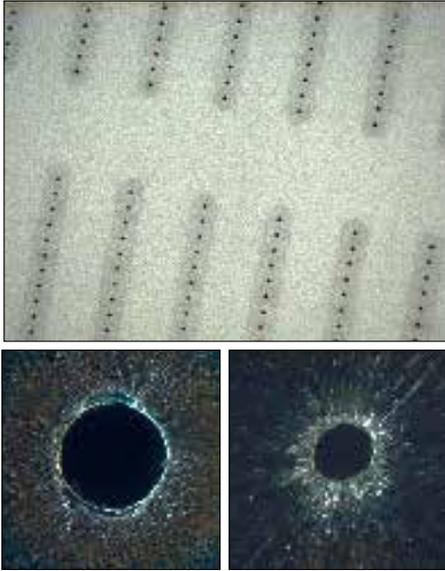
High speed (3,000 holes/sec) percussion hole drilling in a silicon wafer. Bottom photos show the 60 µm diameter entry hole and the 30 µm diameter exit hole
